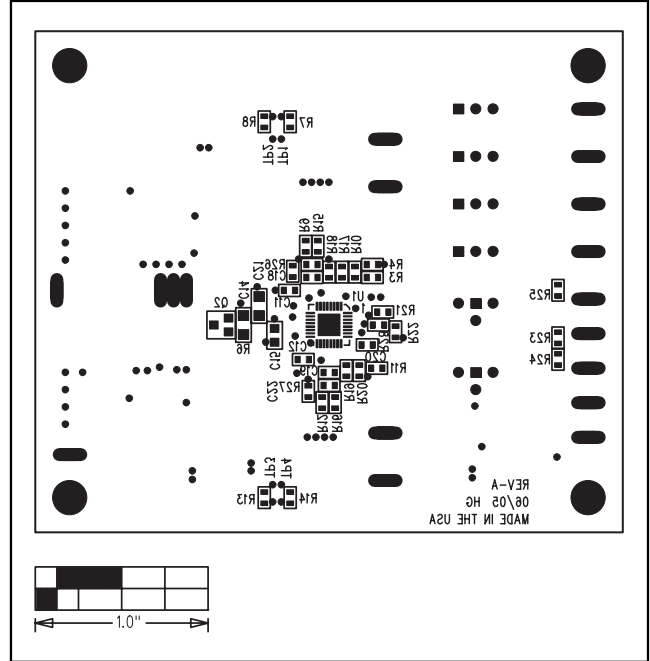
MAX8744A EV Kit Component Placement Guide—Solder Side
